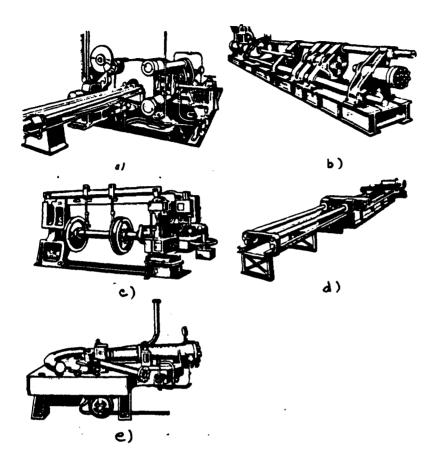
Horizontal presses: a) bar-tube; b) drawn-out; c) wheel; d) correct-stretching; e) tube-bending.
